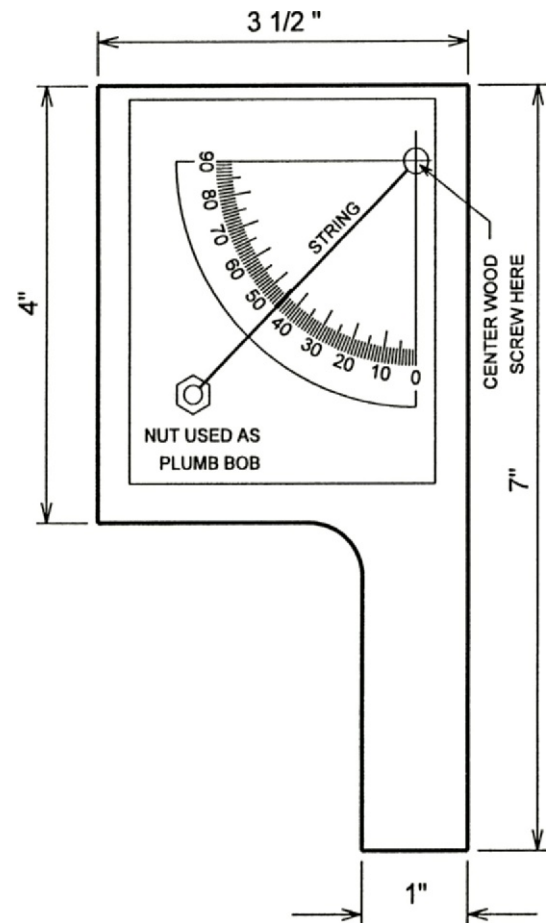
Construction drawing for building the angle-finder. Any similar dimensions will work equally well.
